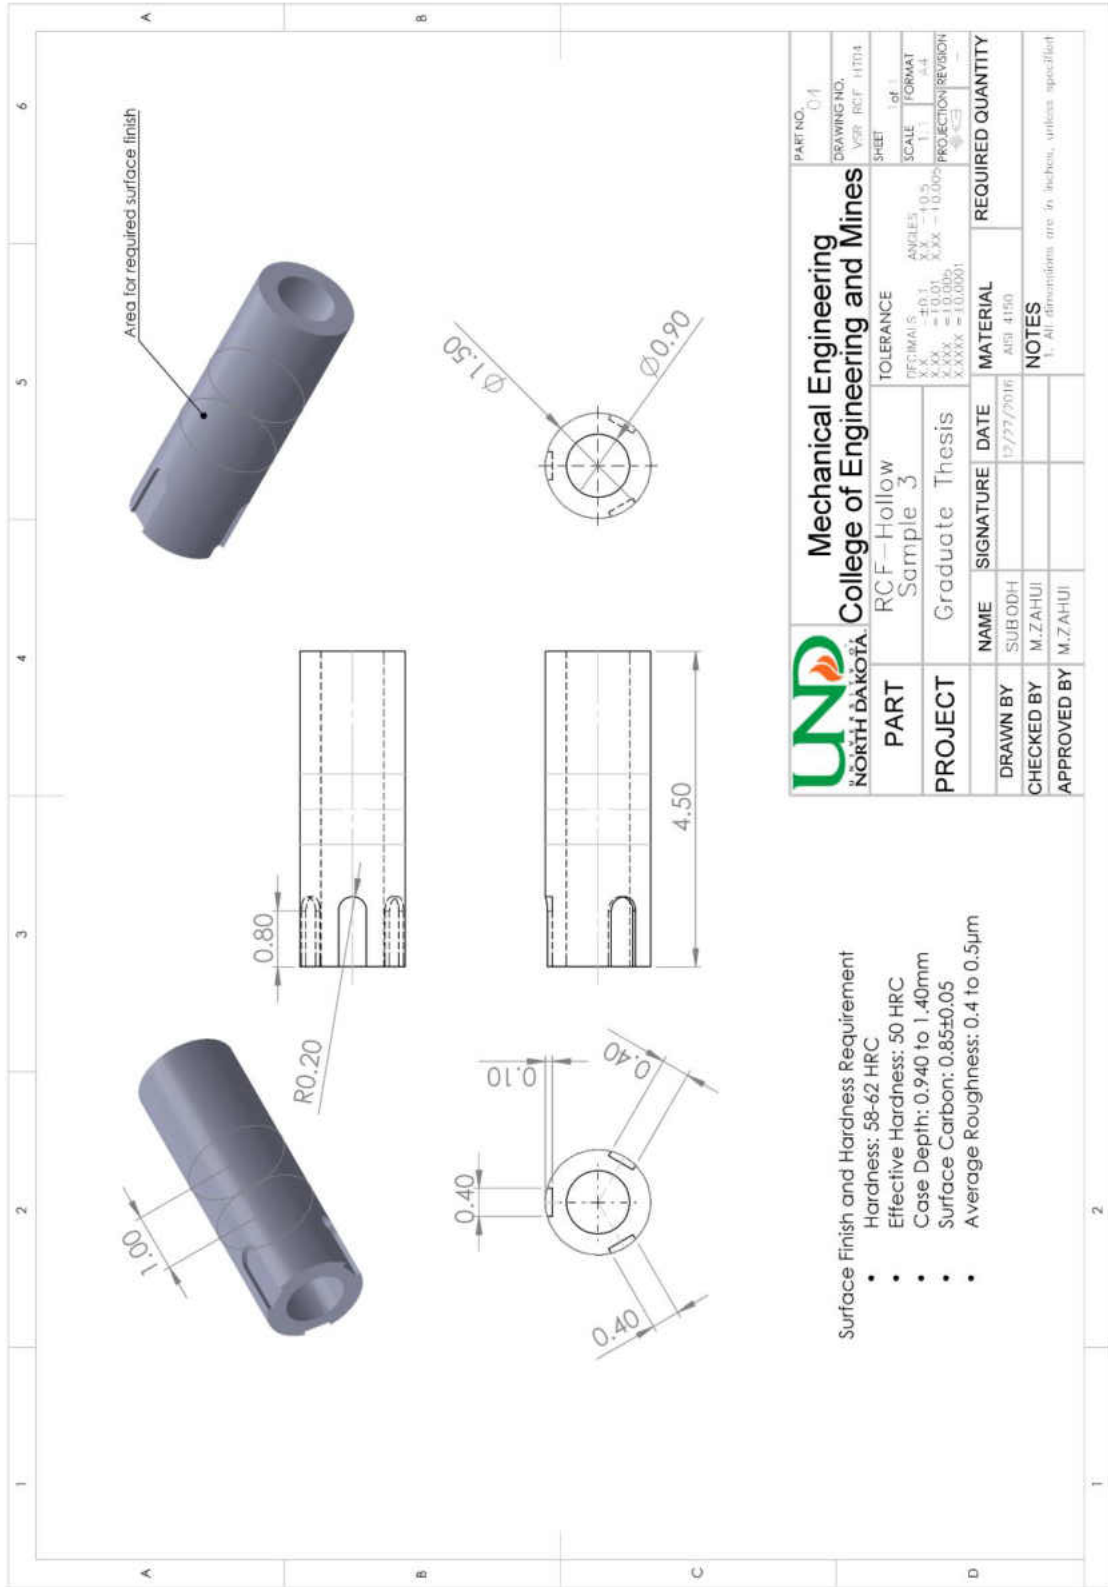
Manufacturing Drawing for RCF Testing of 60% Hollow Specimen.
